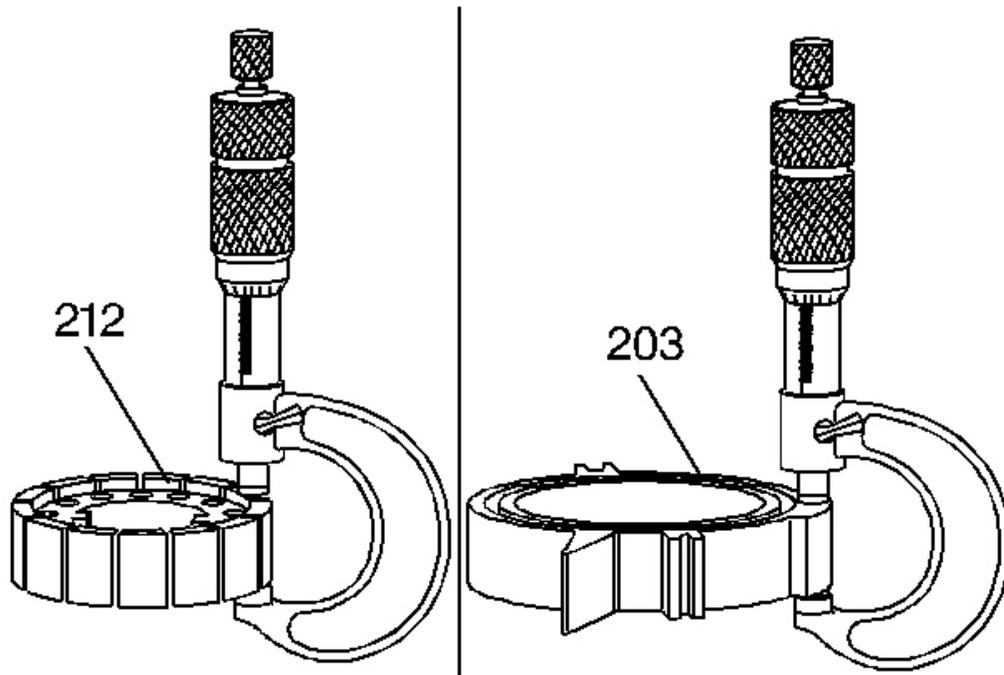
Measuring Oil Pump Motor & Oil Pump Slide Thickness
